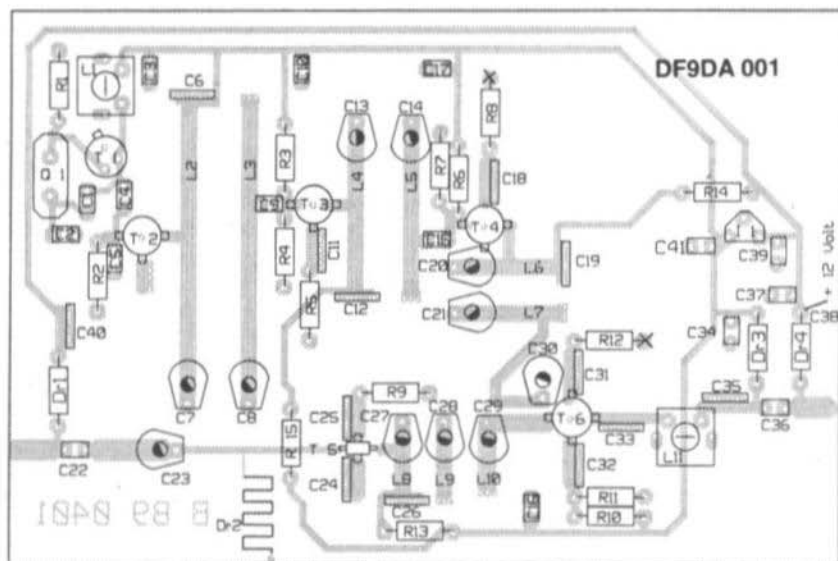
Component layout plan for the through-contacted glass-fibre PCB DF9DA 001
